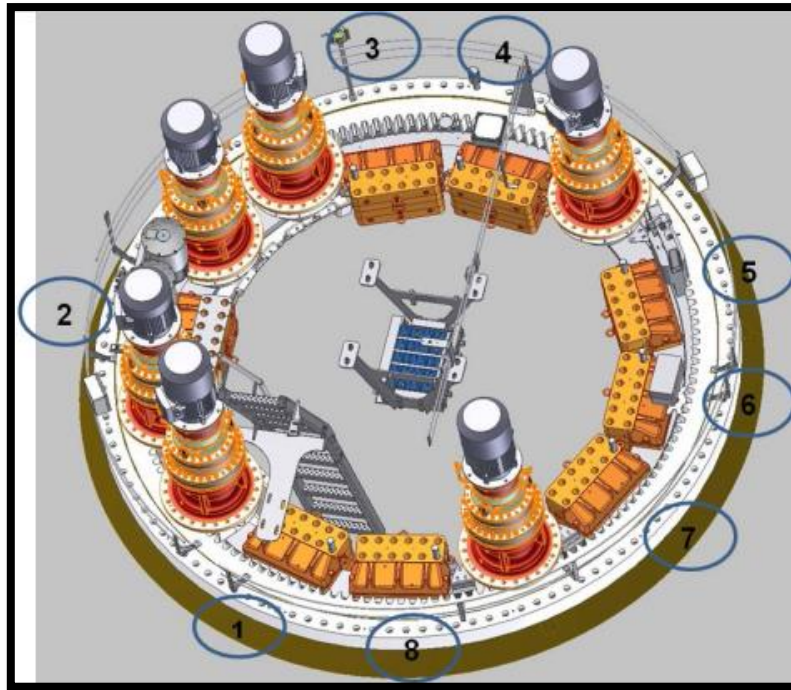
Yaw Caliper Position in a Siemens 3.6MW
